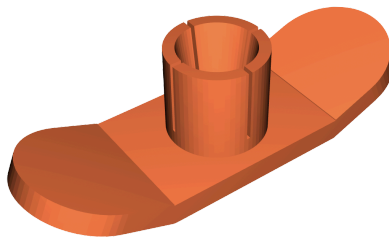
CAD design of the sled endcap design. The dimensions of this design are 120 x 100mm for the bottom rubber coating, and 25.3 x 30mm for the top section which clips into the walker leg.
